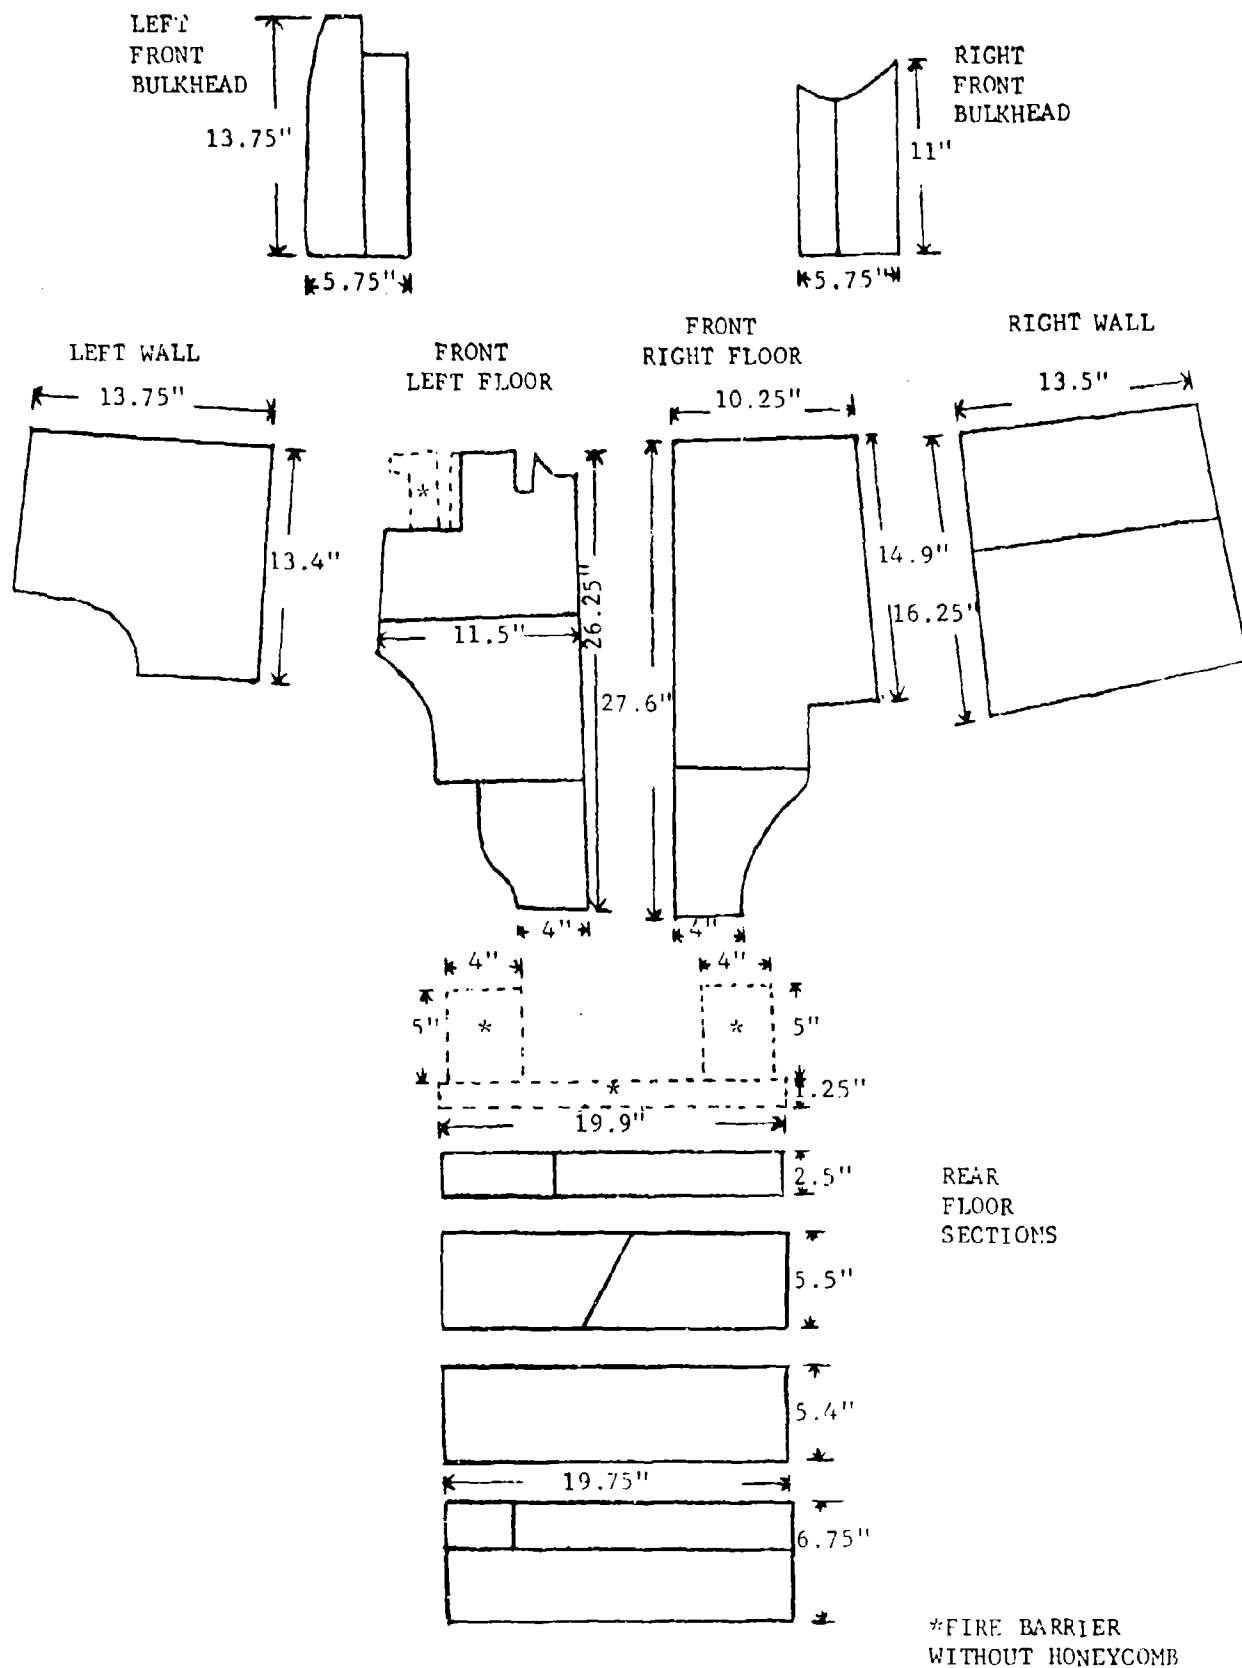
EXPLODED DIAGRAM OF FIRE BARRIER SECTIONS IN A-4 COCKPIT
